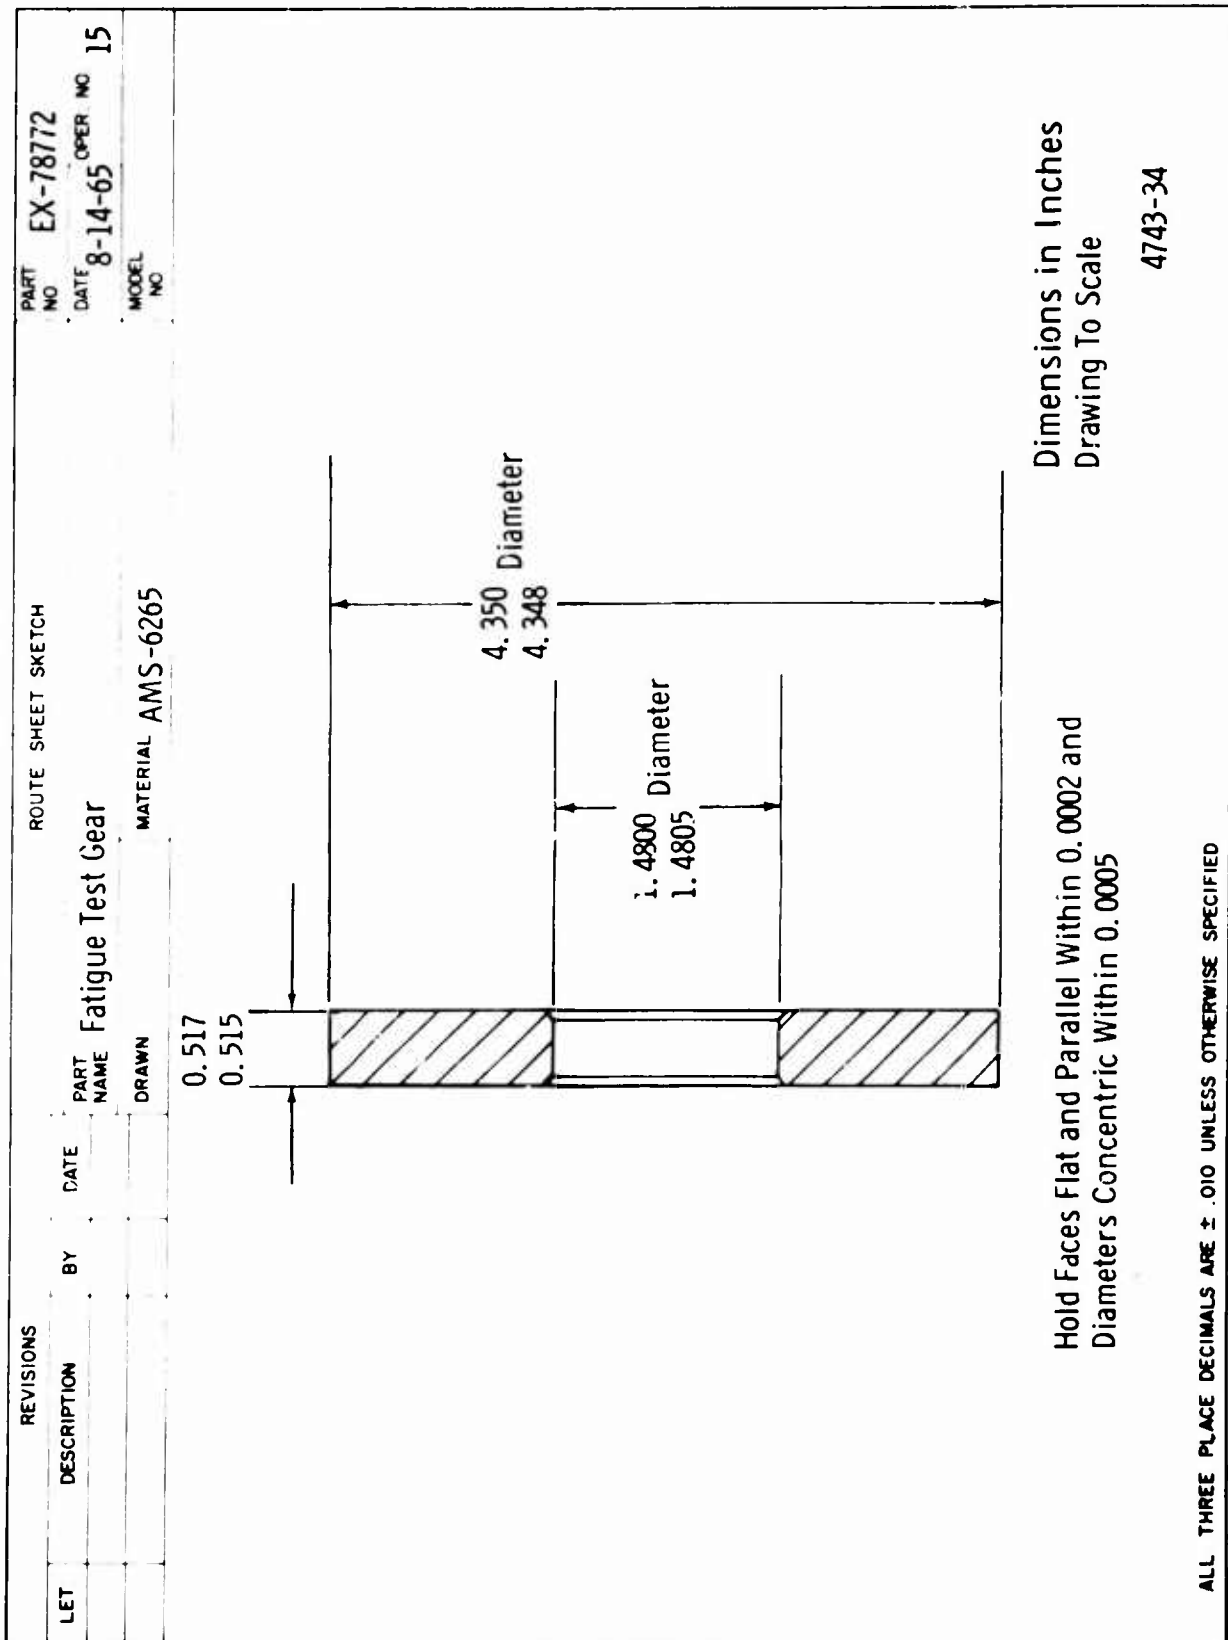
Typical Routing Sheet for Full Form Ground Fillet Gear, EX-78772 (Sheet 8 of 9).
